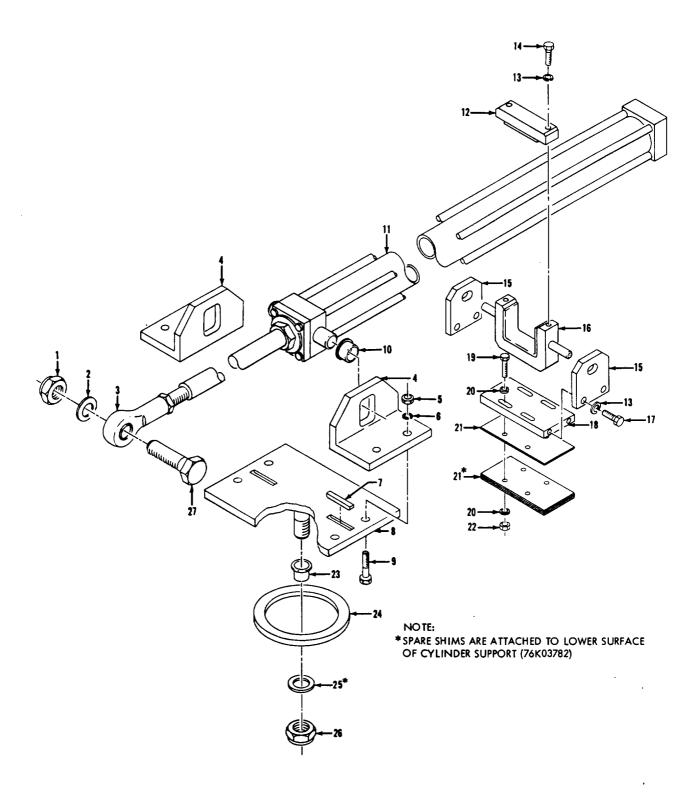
Platform Extend Cylinder Mount Assembly (Sheet 1 of 2)
